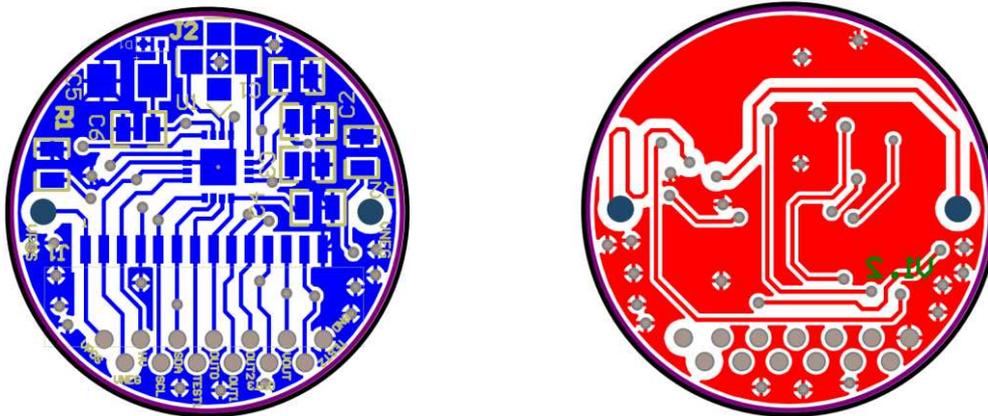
STENH02 PCB's top layer. Figure 1.5.2 – STENH02 PCB's bottom layer.
